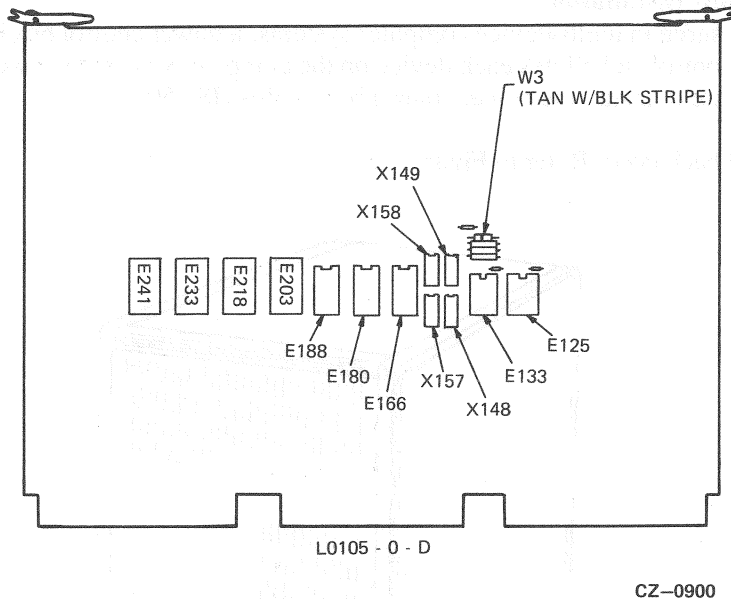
I/O Control Processor Module W3 Jumper Location
